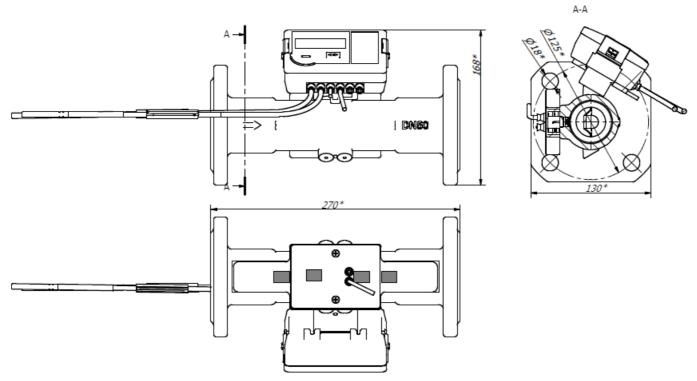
Flanged connection DN50, mounting lenght L= 270 mm
